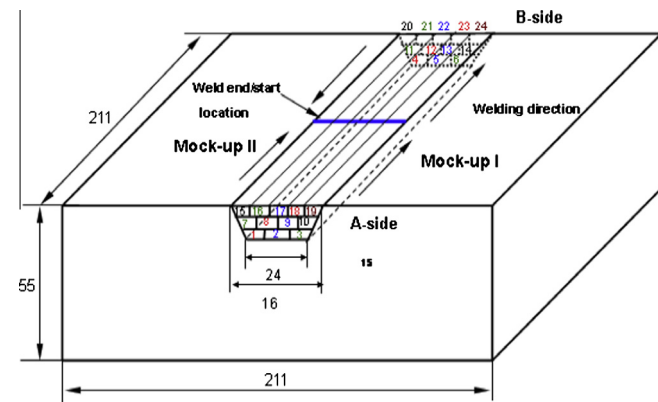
Geometry of groove-welded plate along with the locations of individual weld beads as determined from a companion GTAW test weld.
